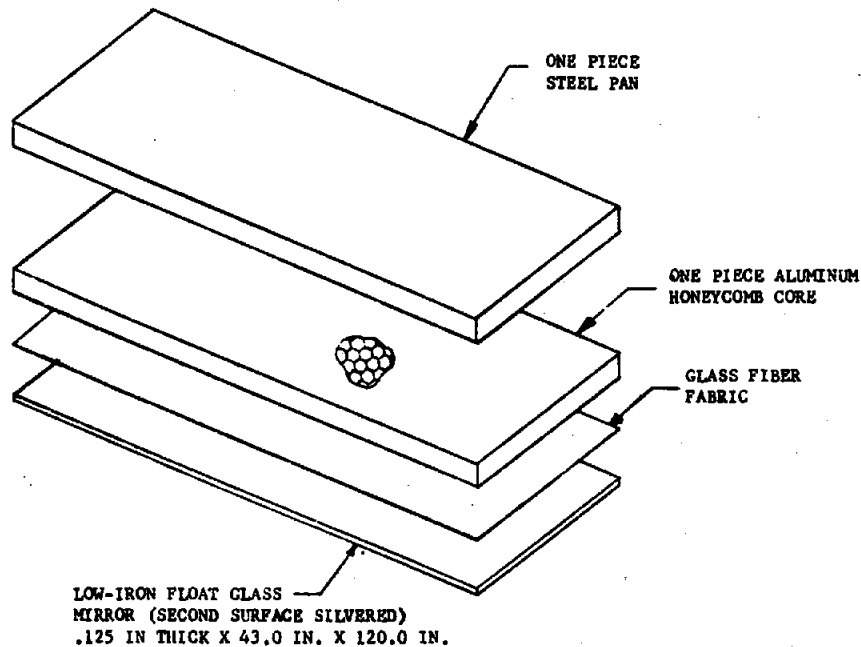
MMC Mirror Module Assembly Honeycomb Core Structure
